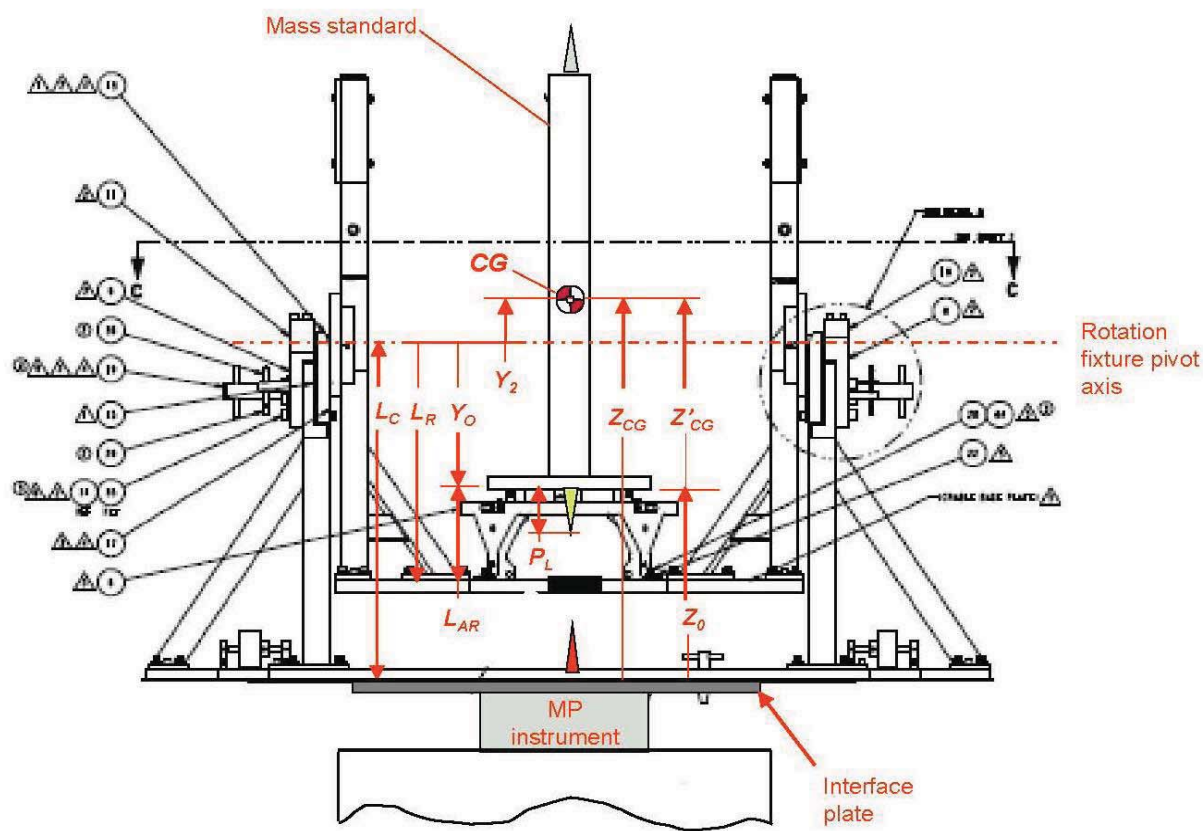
Key dimensions for the mounting fixtures and the test article CG position
